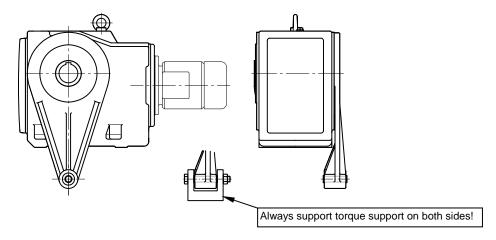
Attaching the torque support on bevel gear and worm gear units
